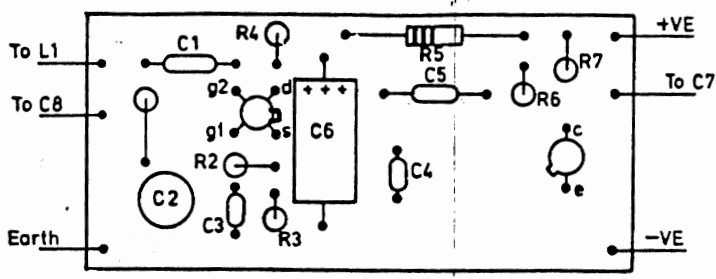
RECEIVER MIXER BOARD LAYOUT
